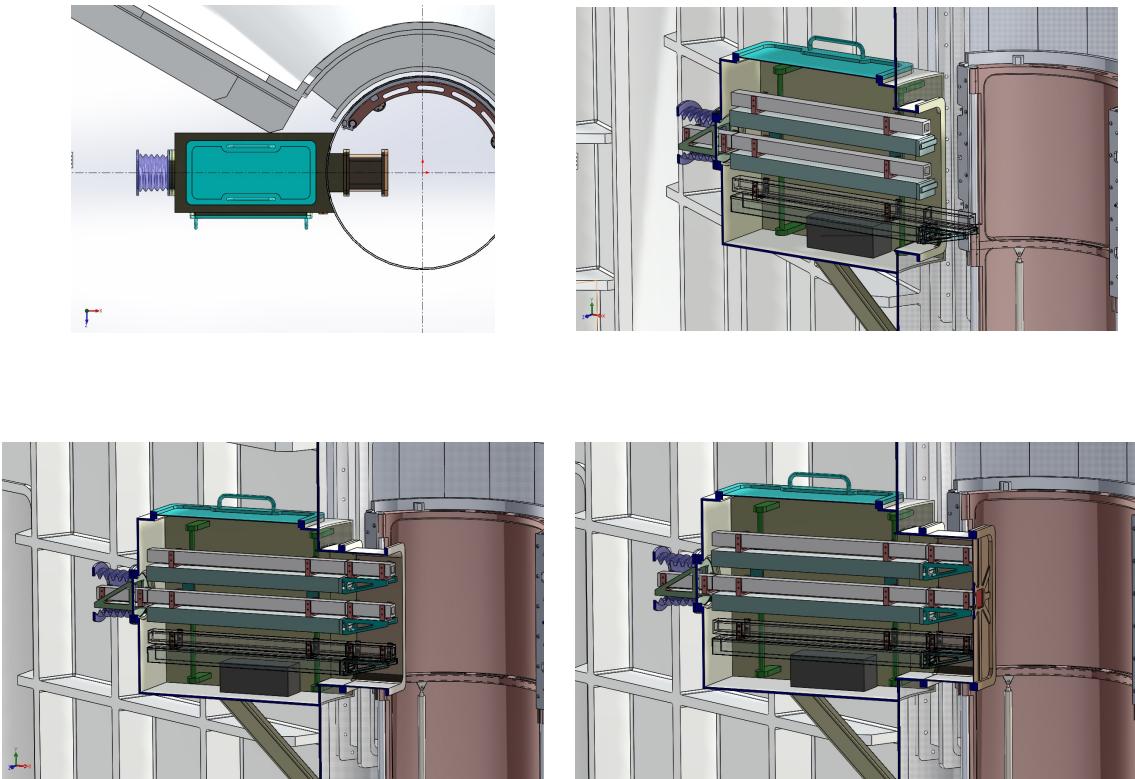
Preliminary Engineering drawings outlining the design for the exchange of the focused and unfocused nose. (top, left) Top view of the guide box within which the exchangeable guide pieces are housed. (top, right) two guide pieces with guide end to sample distance of 50 cm. (bottom, left) Extended guide pieces so that the guide end to sample position is reduced to 20 cm (bottom, right). Extended guide pieces with the final section in place.
